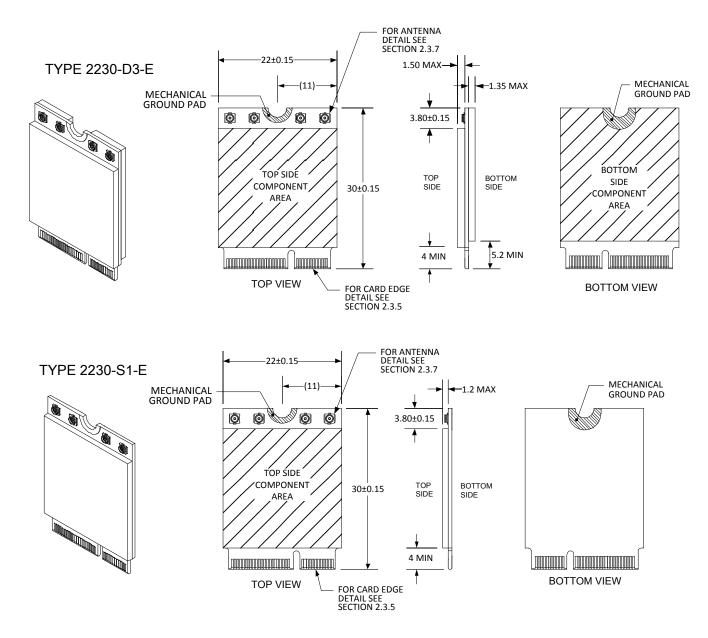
M2 Type 2230-D3/S1 Mechanical Outline Drawing Examples
